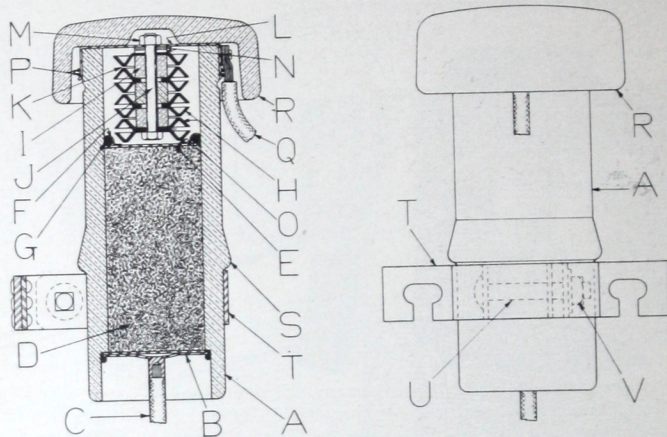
Sectional View Showing Construction of Typical Crystal Valve Arresters
